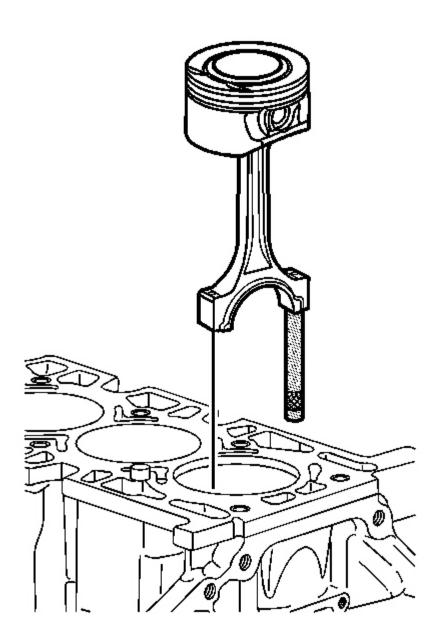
Connecting Rod & Piston Assembly Courtesy of GENERAL MOTORS CORP.
